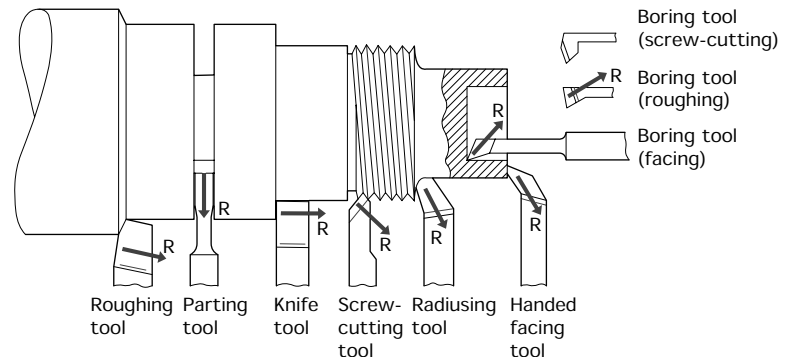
Lathe tool profiles: these tools are right handed; left-hand tools cut towards the tailstock; the arrows indicate the rake angle (R) of each tool
